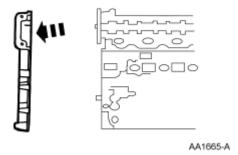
Removing Engine Front Cover From Cylinder Block Courtesy of FORD MOTOR CO.
